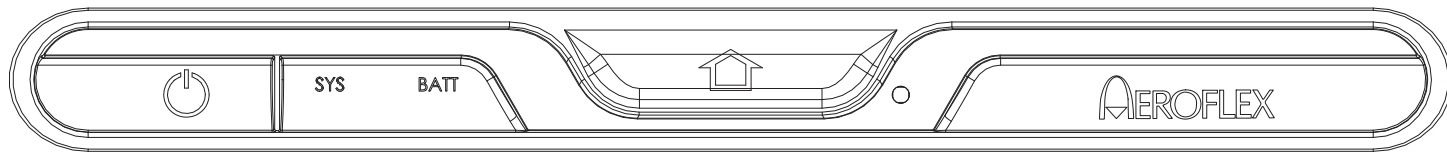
AIT-8000 Panel Control Assembly (A1A1A2)
